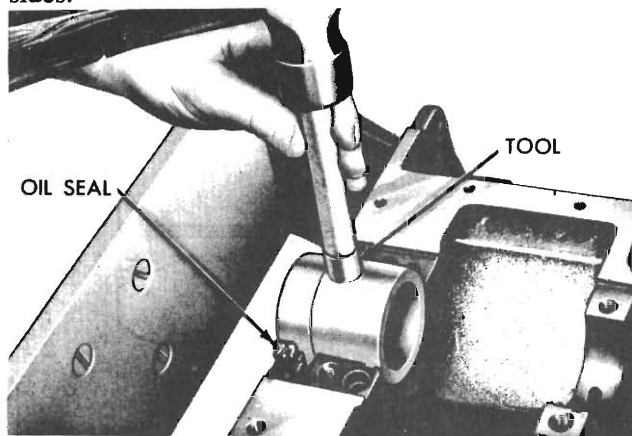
Installing rear main bearing oil seal (Tool E9C60C)
